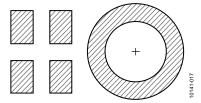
Example PCB Land Pattern with No Enclosing Ring
